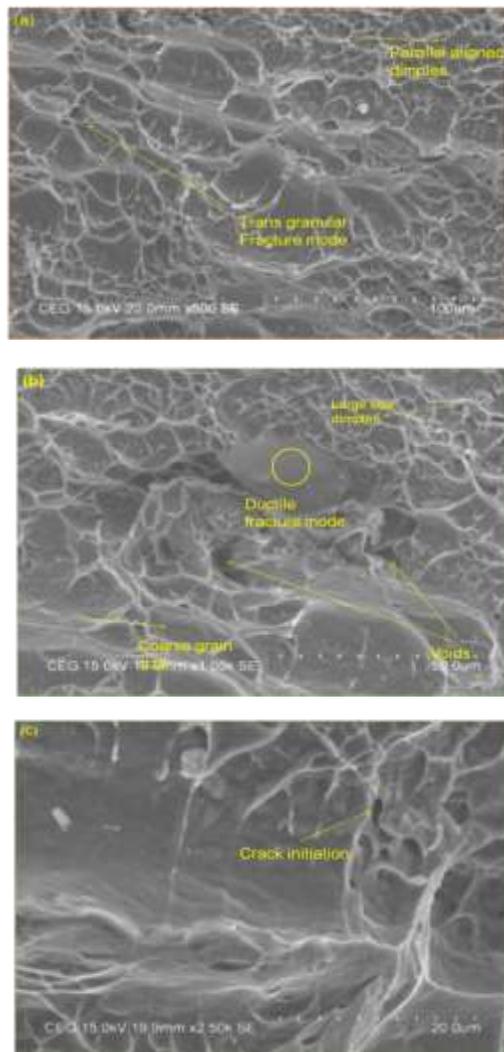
SEM analysis of fracture surfaces of different weld bead shapes under tensile testing
